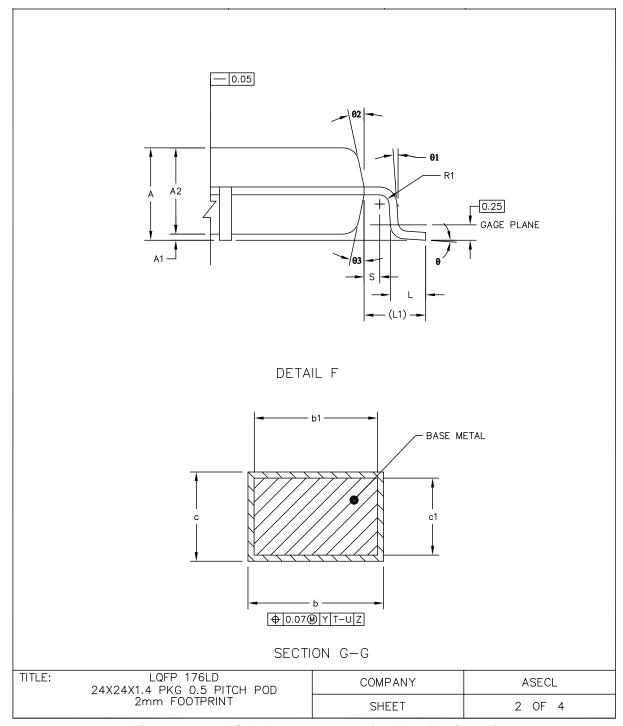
176 LQFP Package Mechanical Drawing (part 2)
